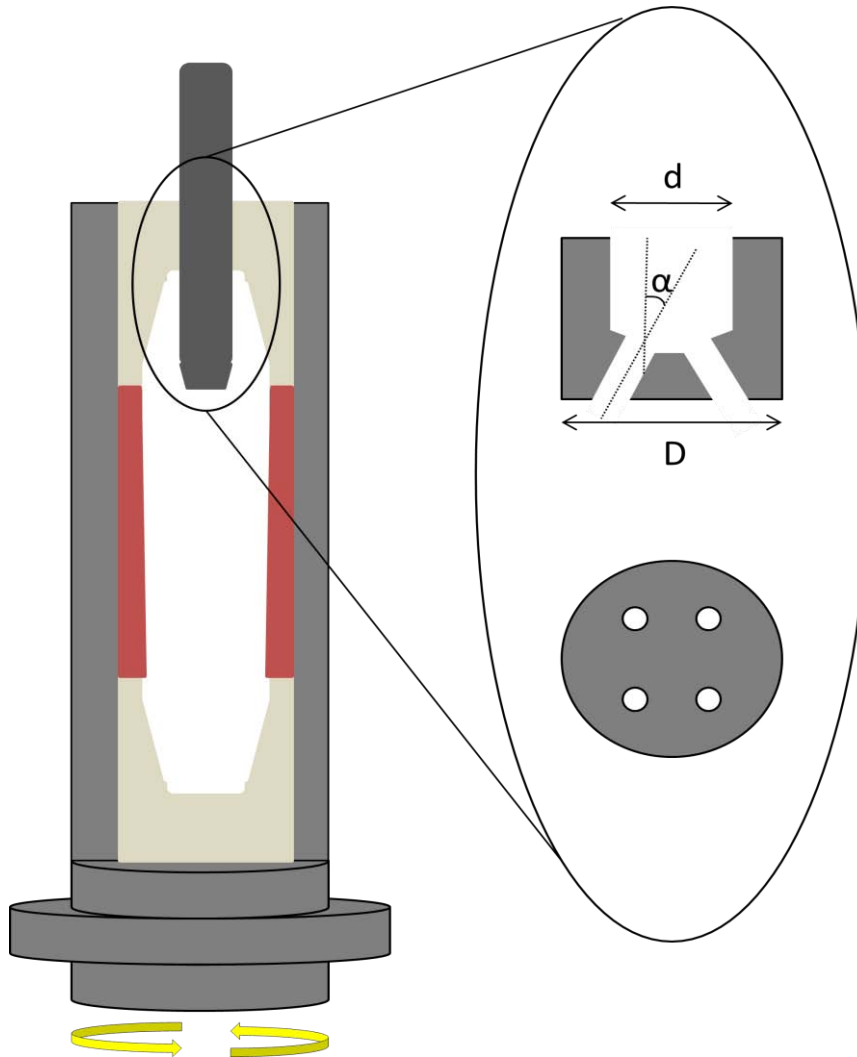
The centrifugal casting structure, with a focus of the casting nozzle on the side view and the bottom view.
